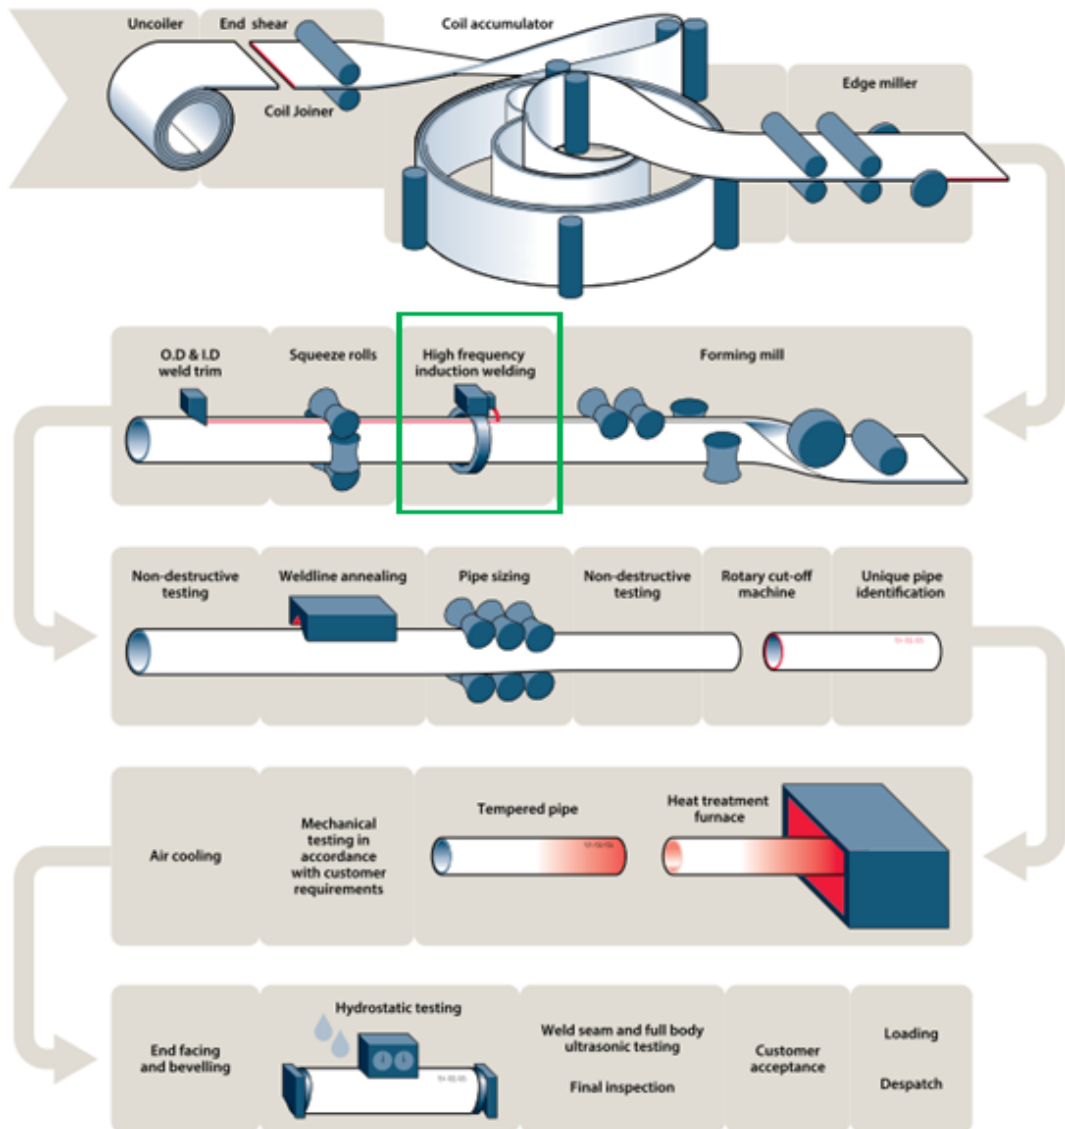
HFI welded pipe manufacturing process [140].
